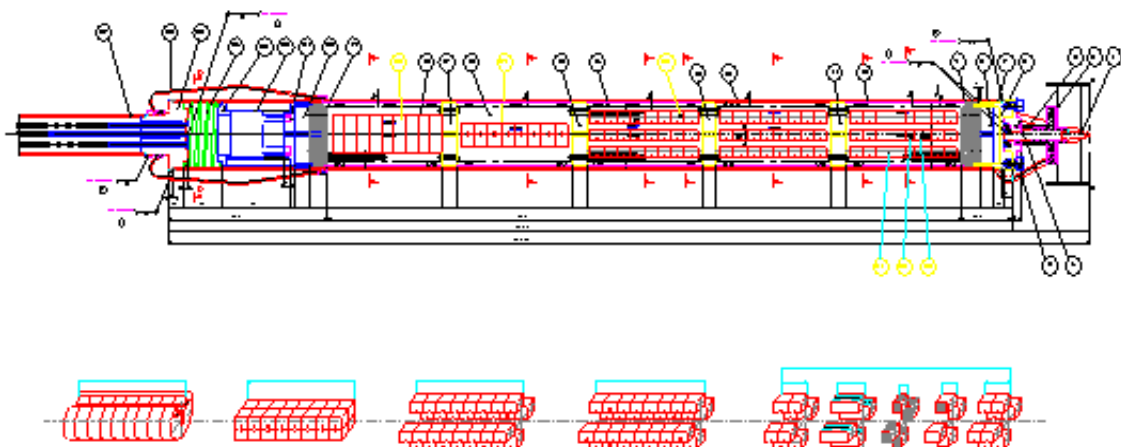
Drawing of HANARO capsule (98M-02K) for the irradiation of RPV material.
